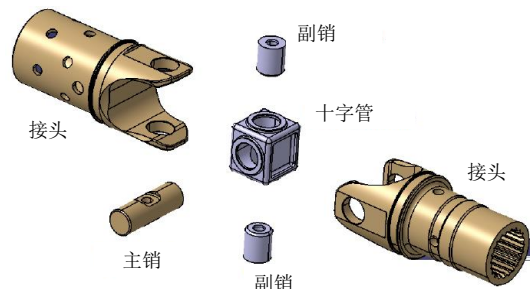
Schematic diagram of cross shaft torque tube universal joint
